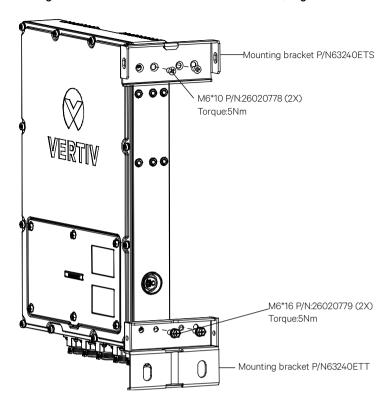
Installing the Mounting Brackets to the Rear Panel of the Rectifier (Flat)
